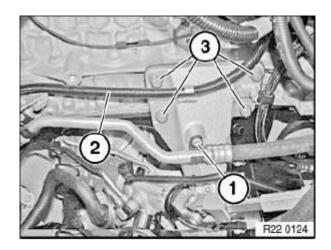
Identifying Corrugated Tube From Retainer Courtesy of BMW OF NORTH AMERICA, INC.
